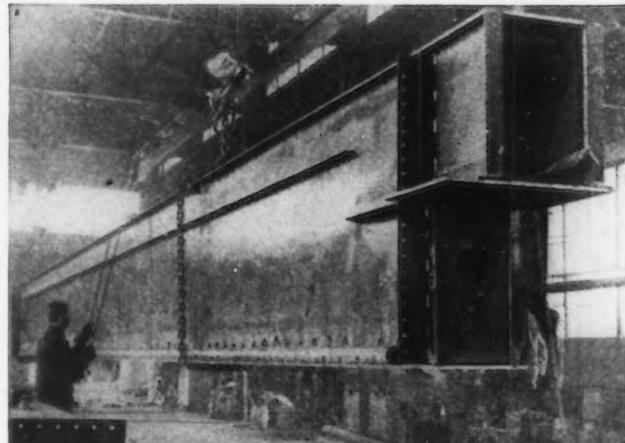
Girder for 60-ton capacity crane AC weld fabricated with the new Lincoln "Fleetwelder." Top and bottom plates are $\frac{7}{8}$ " steel . . . sides are $\frac{5}{16}$ " plate. Girder is 85 ft. long, 76 in. high and 28 in. wide . . . weighs 20 tons.
